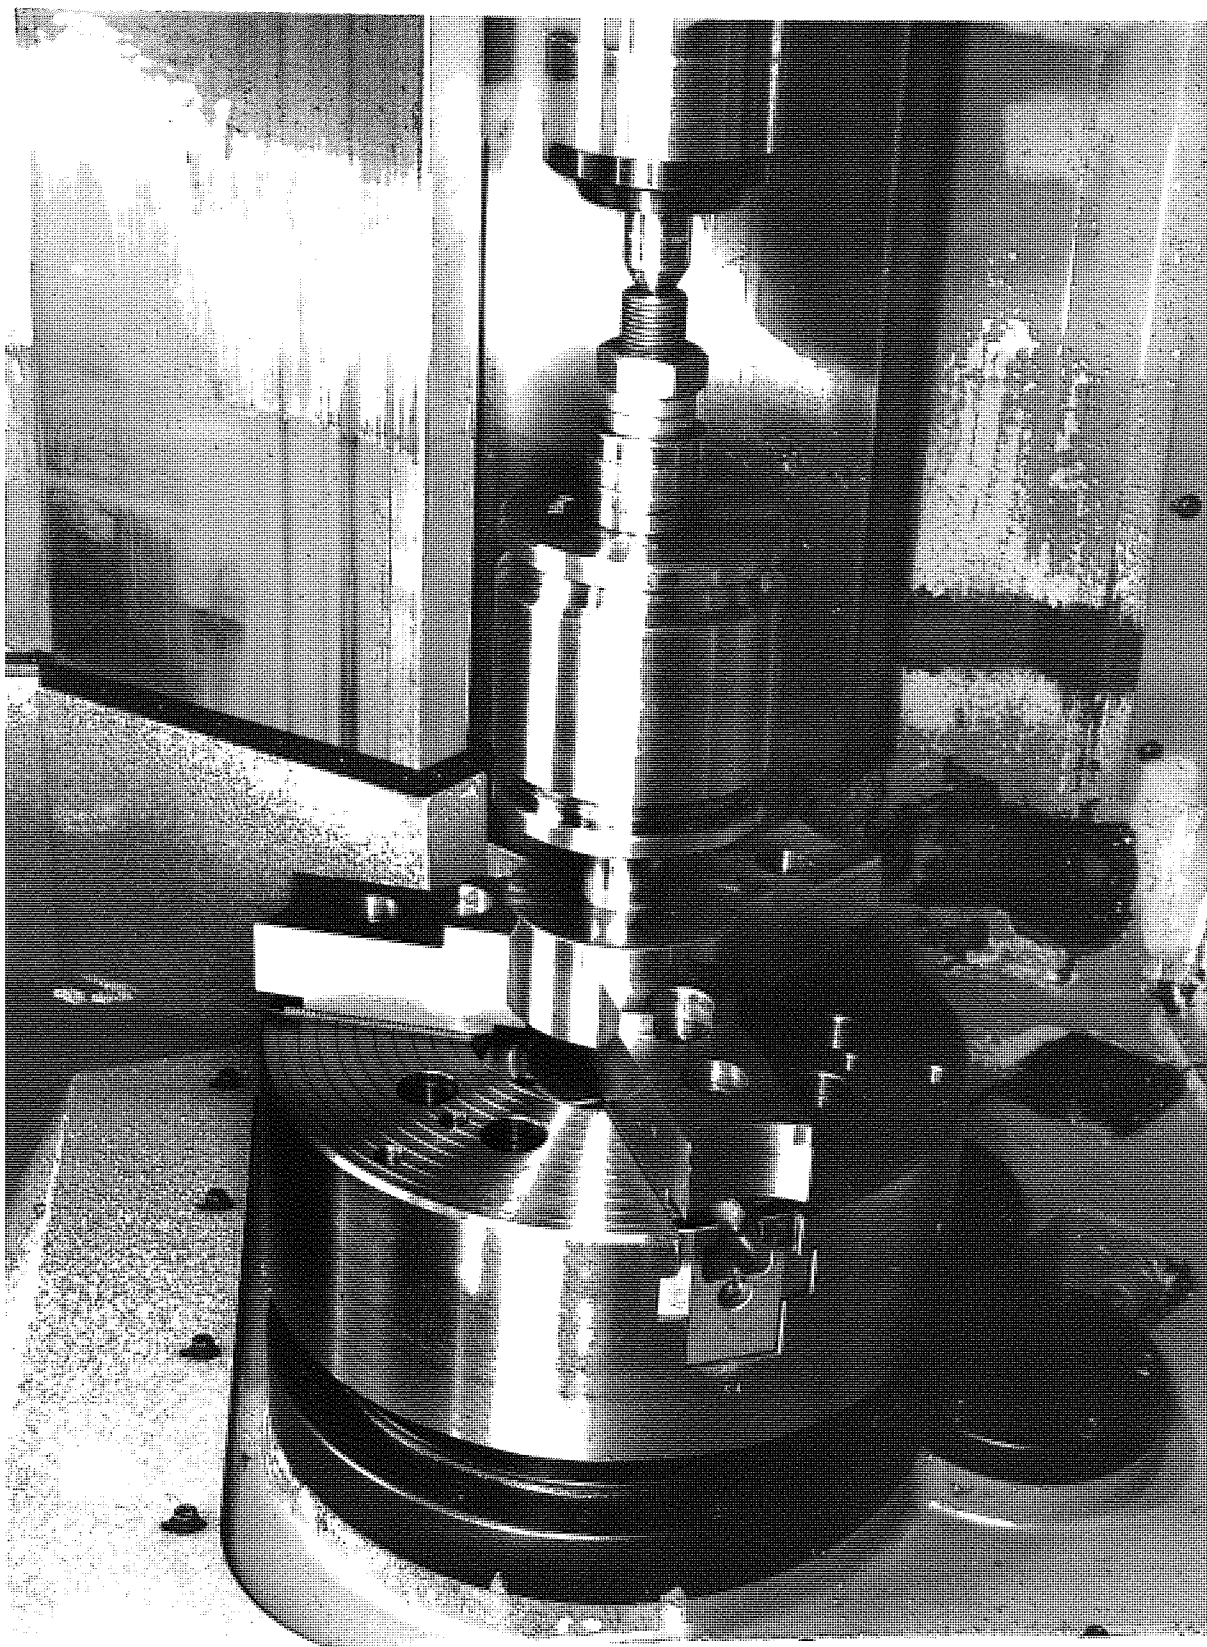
A TYPICAL ROLL BEING HELD BY A MANDREL
